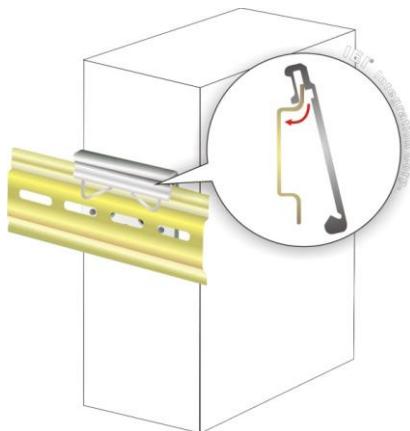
Attach the Mounting Bracket to the DIN Rail
